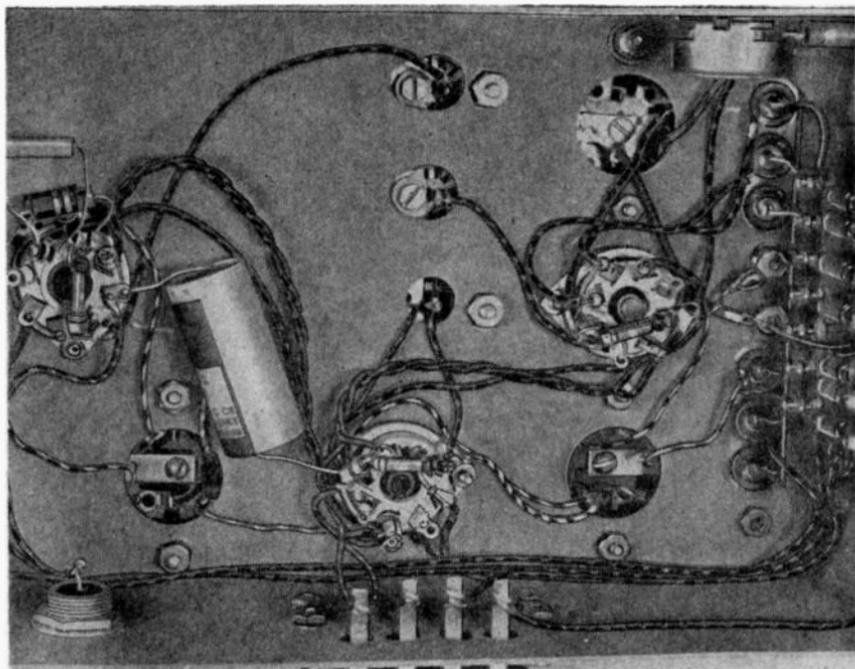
Under-chassis wiring is simple and appearance improved by resistor board.
